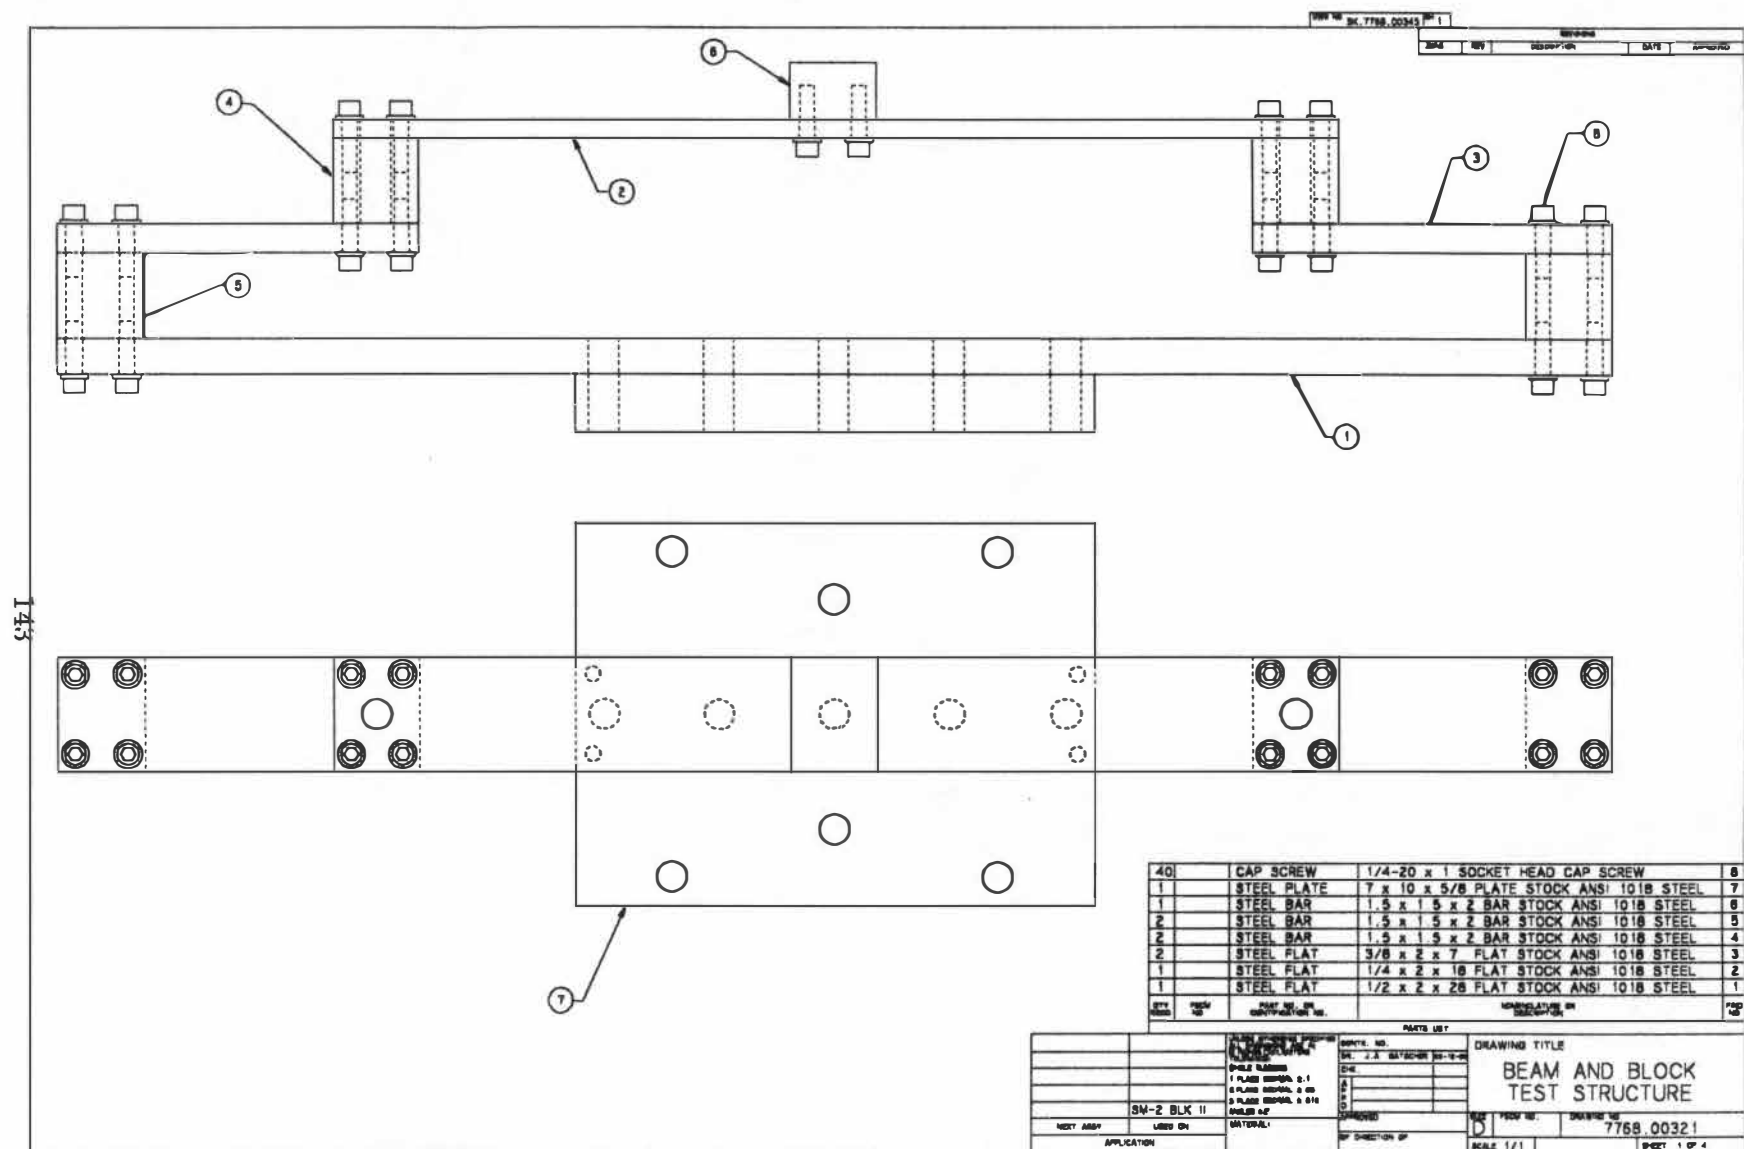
Fabrication drawing of beam and block test structure - sheet 1.
